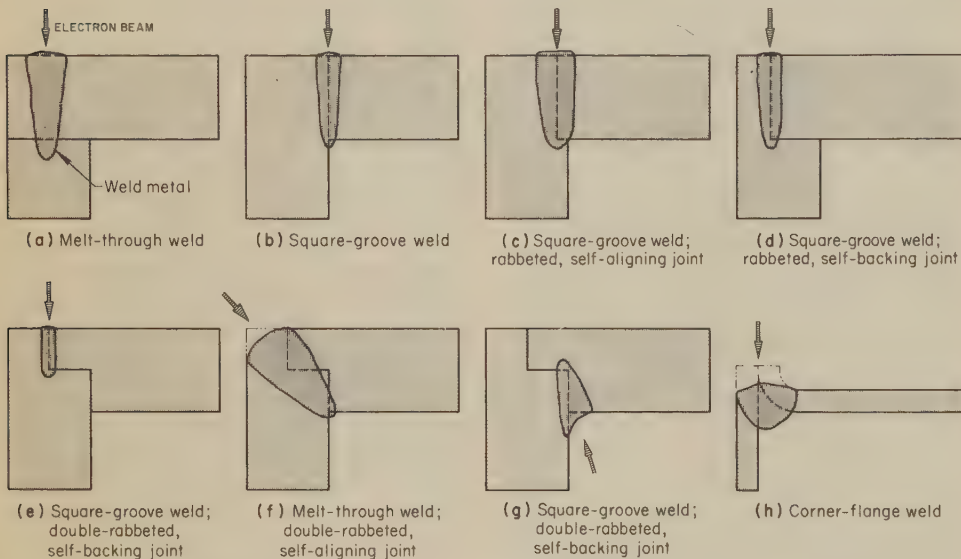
Eight types of corner joints and welds used in electron beam welding
